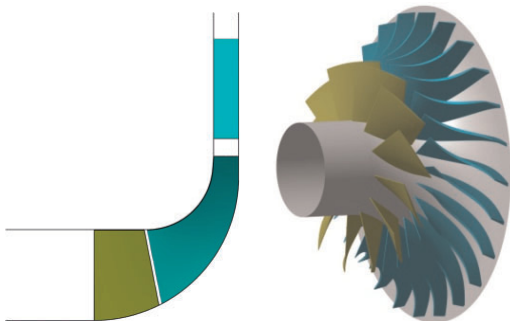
Tandem impeller for small turbojet engines⁽¹³⁾
